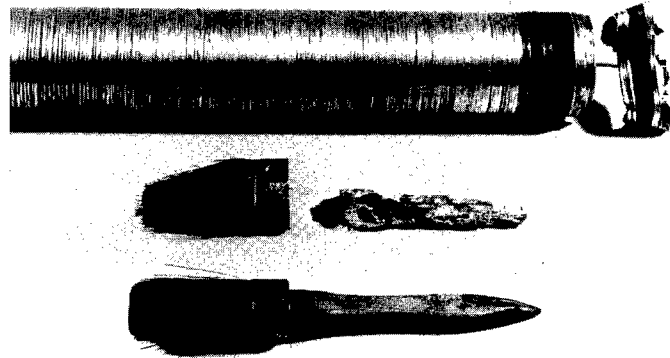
Sheared tail rotor drive shaft caused by paint brush. New brush is shown with brush that caused damage.
